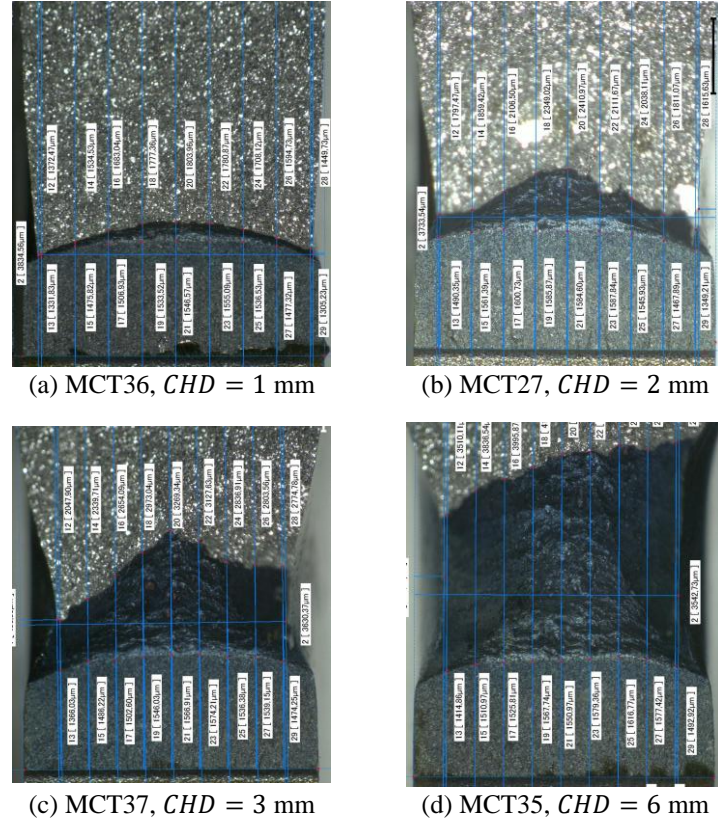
Fracture surfaces of four MCT specimens tested at RT with final crosshead displacements between 1 and 6 mm
